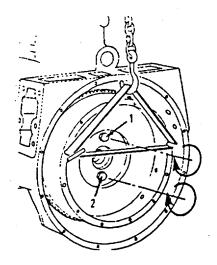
Flywheel and Flywheel Housing Group.
